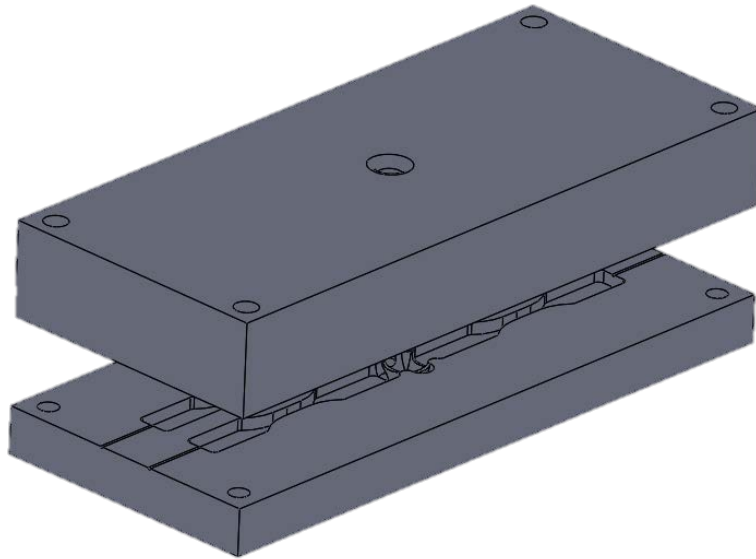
Injection mold Part A (top), Part B (bottom).
